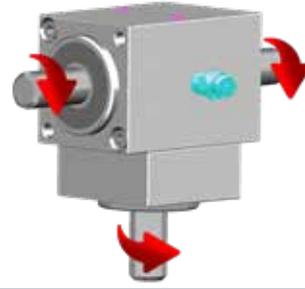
Gearboxes with 3 outputs - Winkelgetriebe mit 3 Ausgänge
